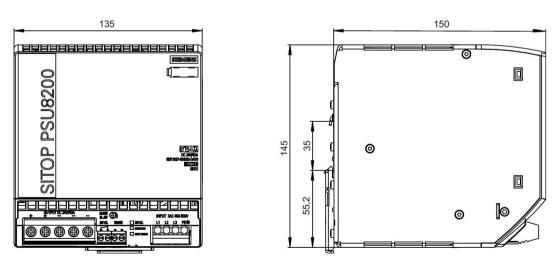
Dimension drawing 6EP3437-8SB00-0AY0, 6EP3447-8SB00-0AY0 and 6EP3437-8UB00-0AY0
